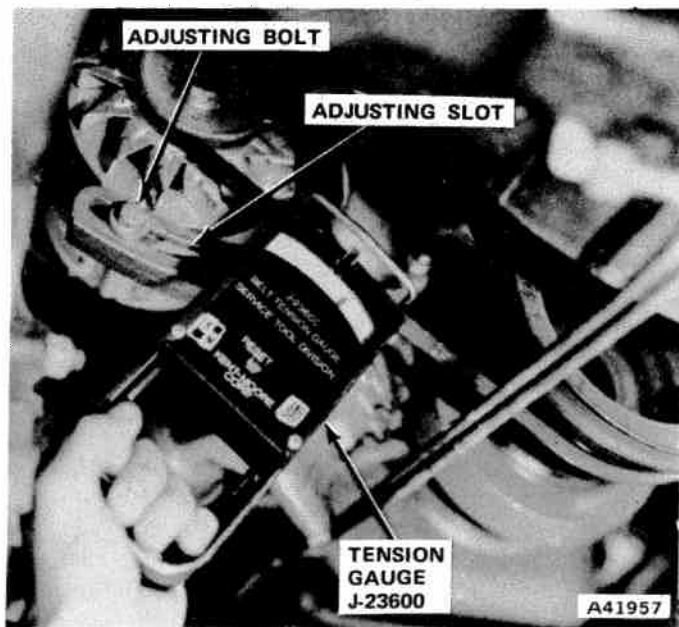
Checking Belt Tension with Gauge J-23600
